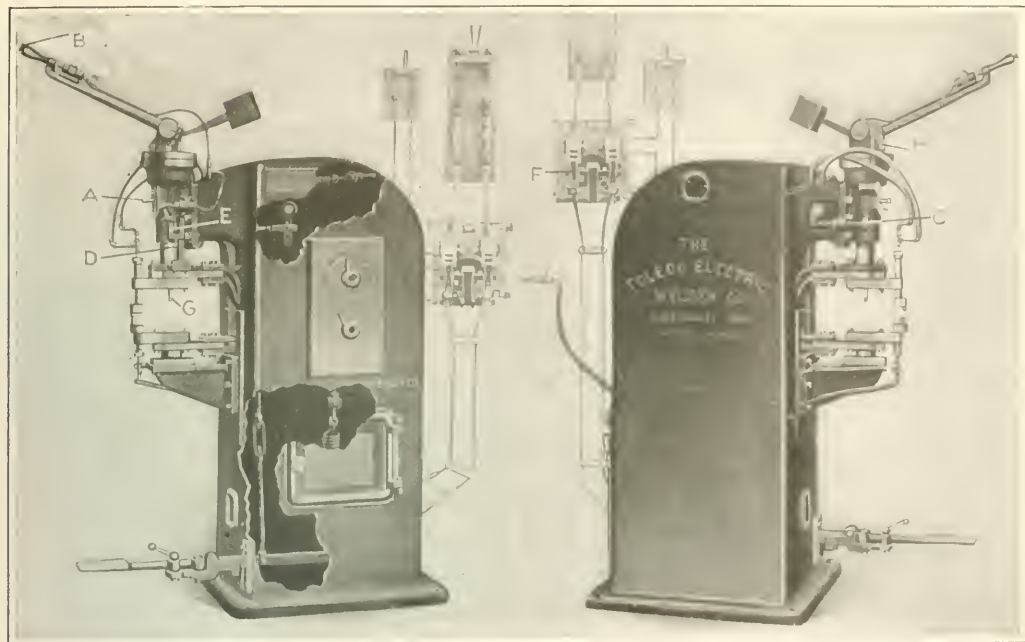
Common Type of Electric Spot-welding Machine sectioned in Certain Places to show Constructional Features
